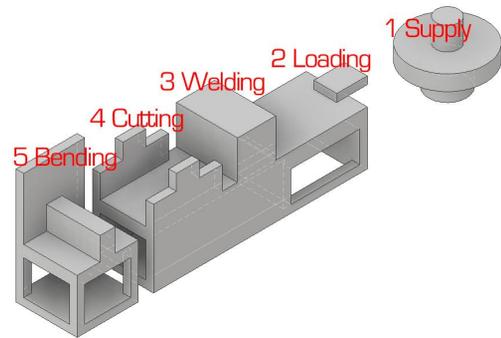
Schematic diagram of Automatic welding machine
